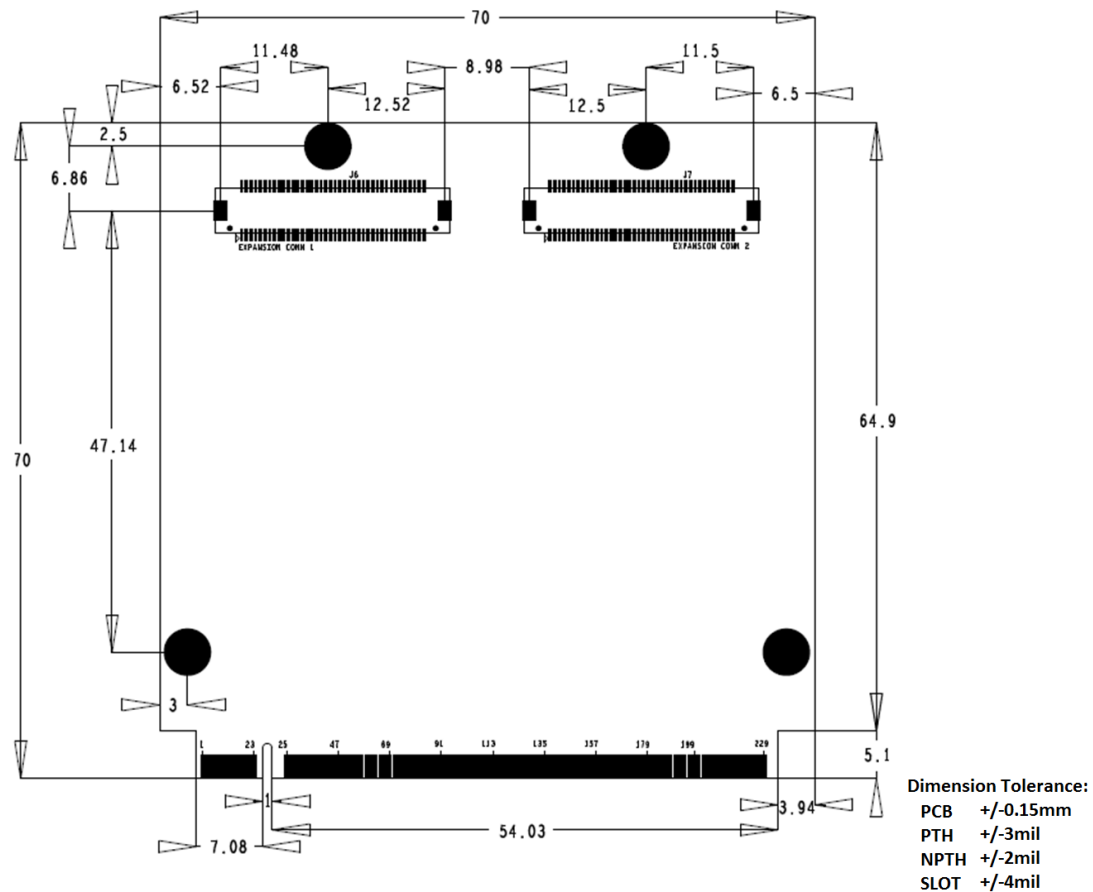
Mechanical dimension of Qseven SOM- Bottom View
